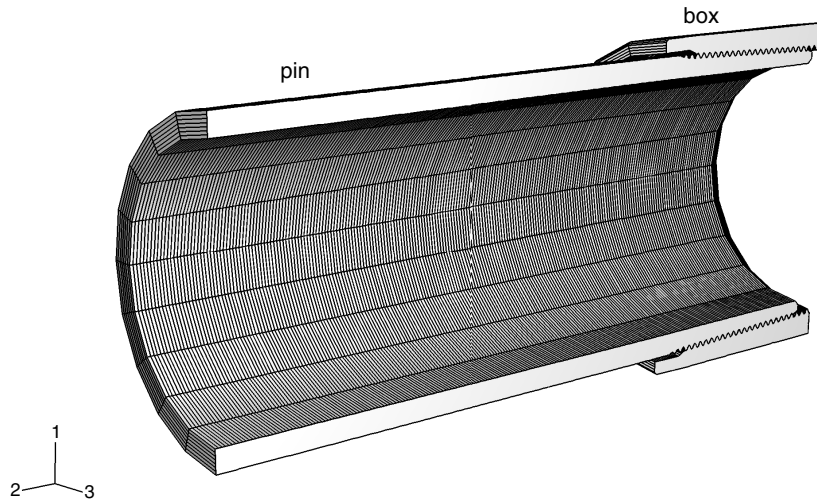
Three-dimensional cut-away view of the threaded connection.
